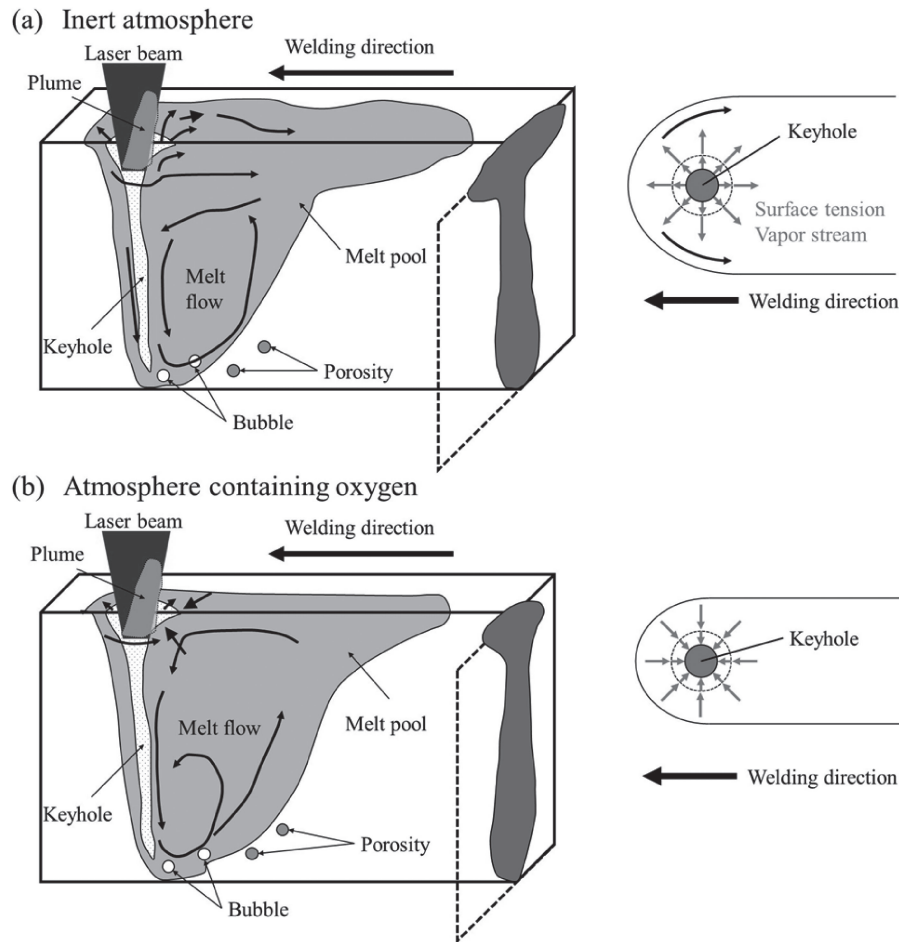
Schematic of the flow of molten metal in the melt pool during laser welding in (a) inert atmosphere and (b) oxygen containing atmosphere.<sup>32)</sup>
